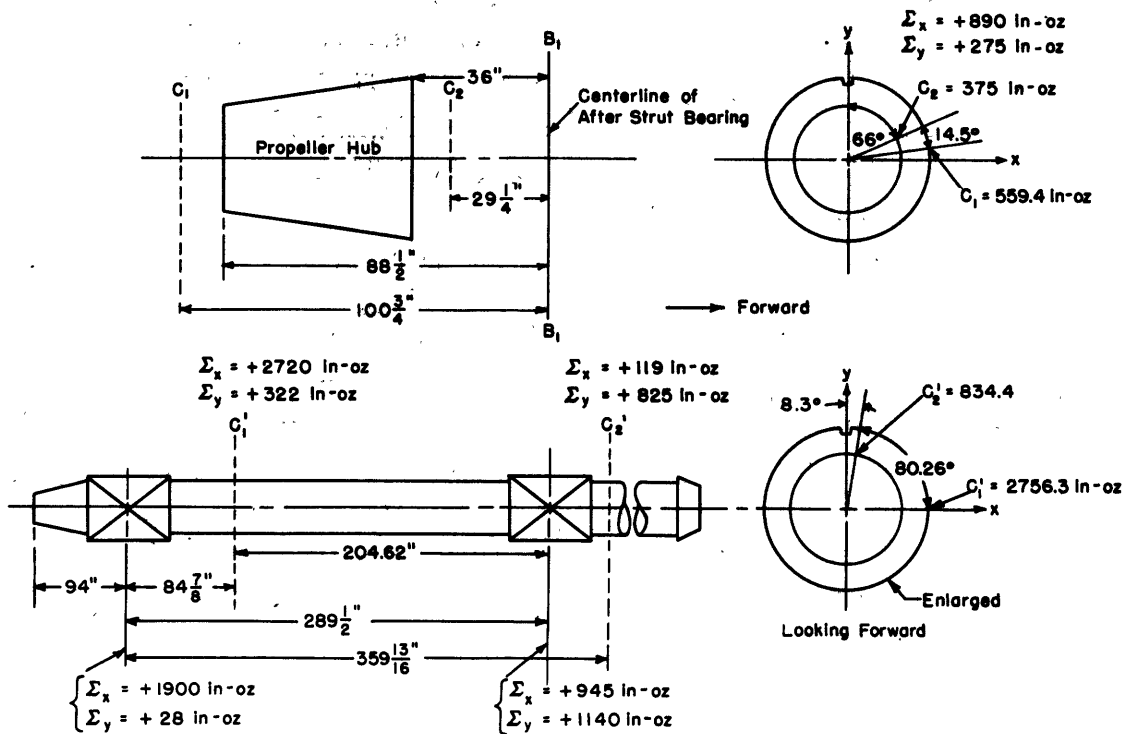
Balancing of the Port Tailshaft and Propeller on the DD865
